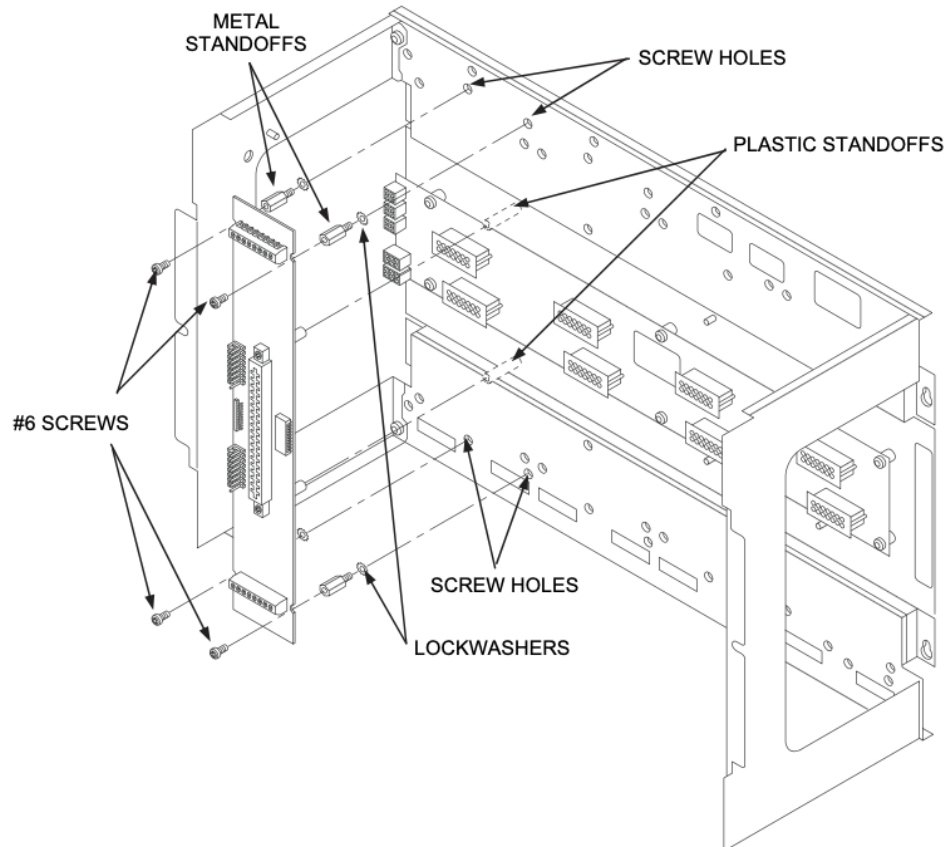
Installing the Motherboard in a 4100ES Expansion Bay
